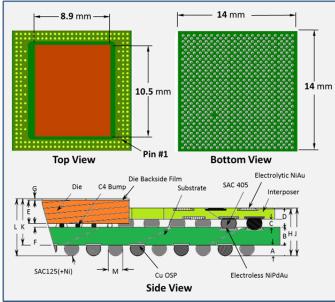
Detailed Top, Bottom and Side Views of the FCMB package
